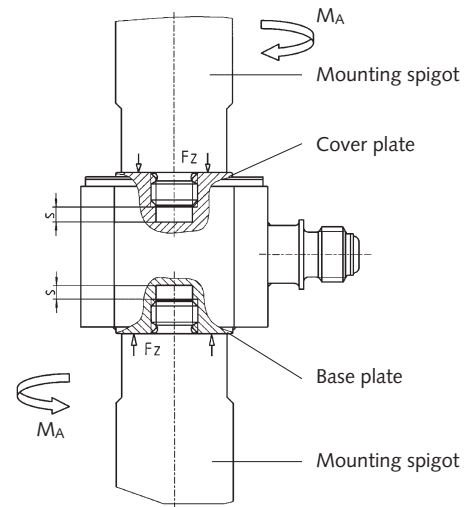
Adaptation A: Mounting Types 9313 and 9323 in shaft with mounting spigots
